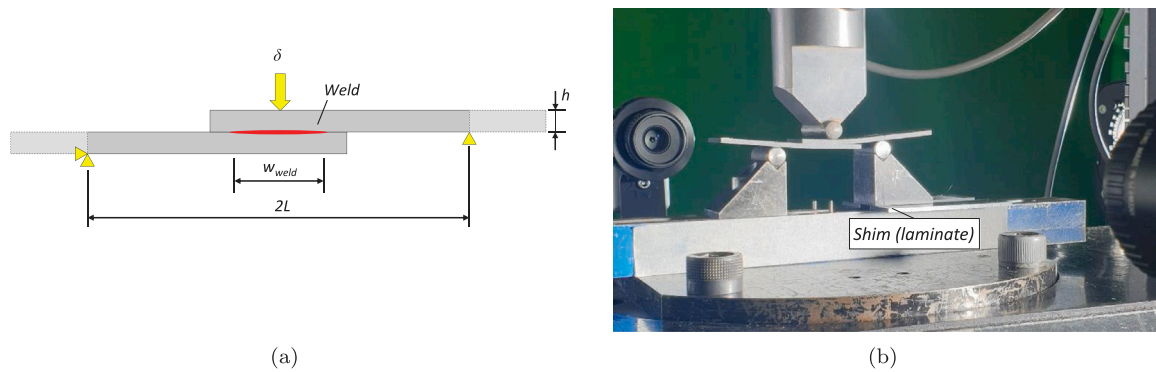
SLS-3PB test at TU Delft: (a) Geometrical parameters; (b) Test setup with crack monitoring camera and DIC system.
